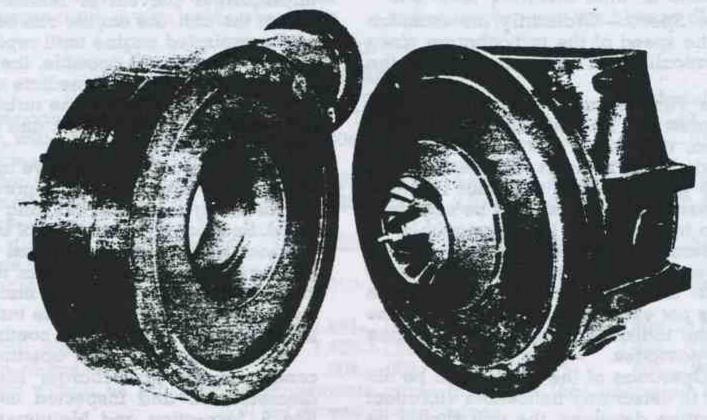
Partially Dismantled View Showing Blower End Sub-Assembly with Vaneless Diffuser and Turbine and Intermediate Casing Assembled with Rotor.
